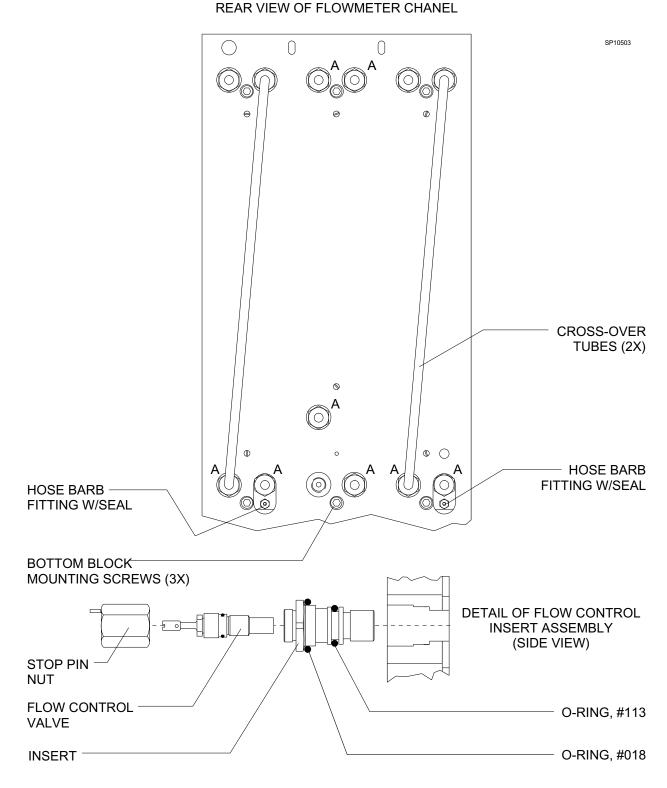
INSTALLATION OF FITTINGS AND FLOW CONTROL VALVE INSERT ASSEMBLY
